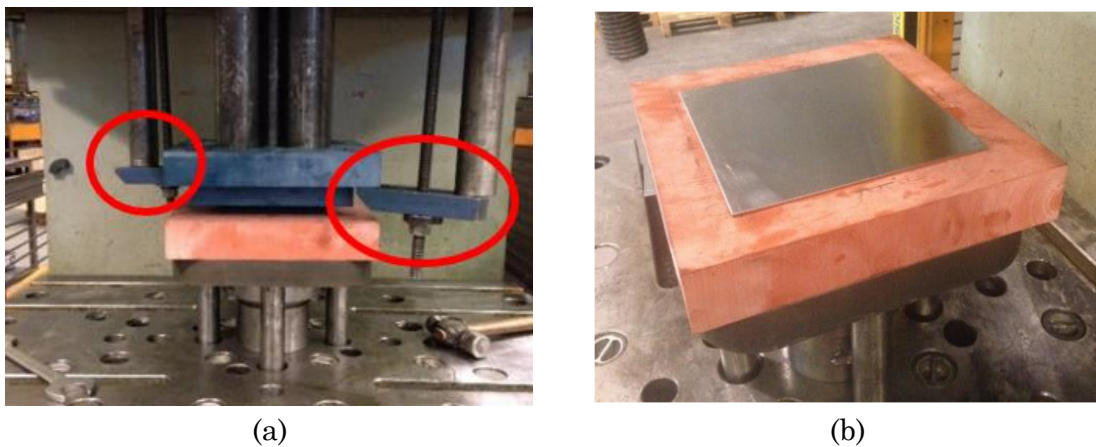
58: configuration of the clamping tools for die locking (a) and the steel ring used for the blankholder (b).
